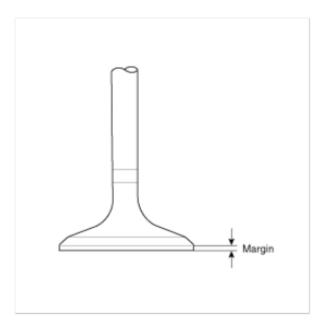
Identifying Valve Head Margin Thickness Courtesy of HYUNDAI MOTOR AMERICA
